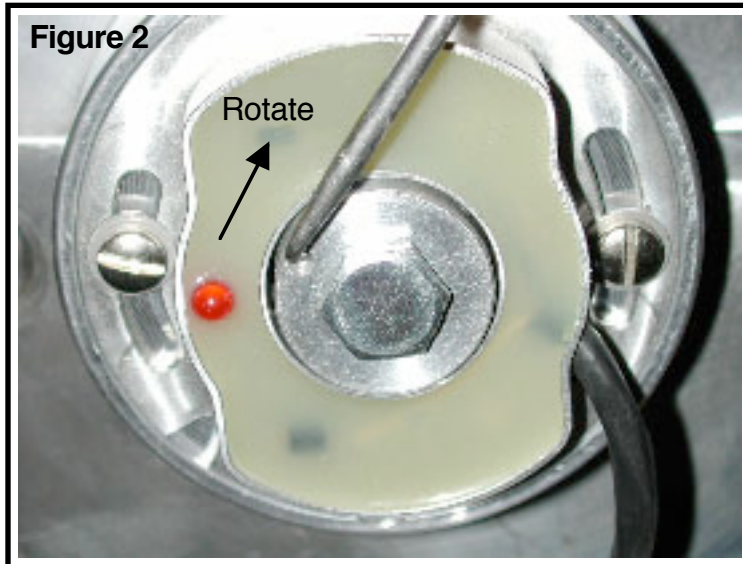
shows how ignition assembly will look when you rotate rotor clock wise to full advance position.
